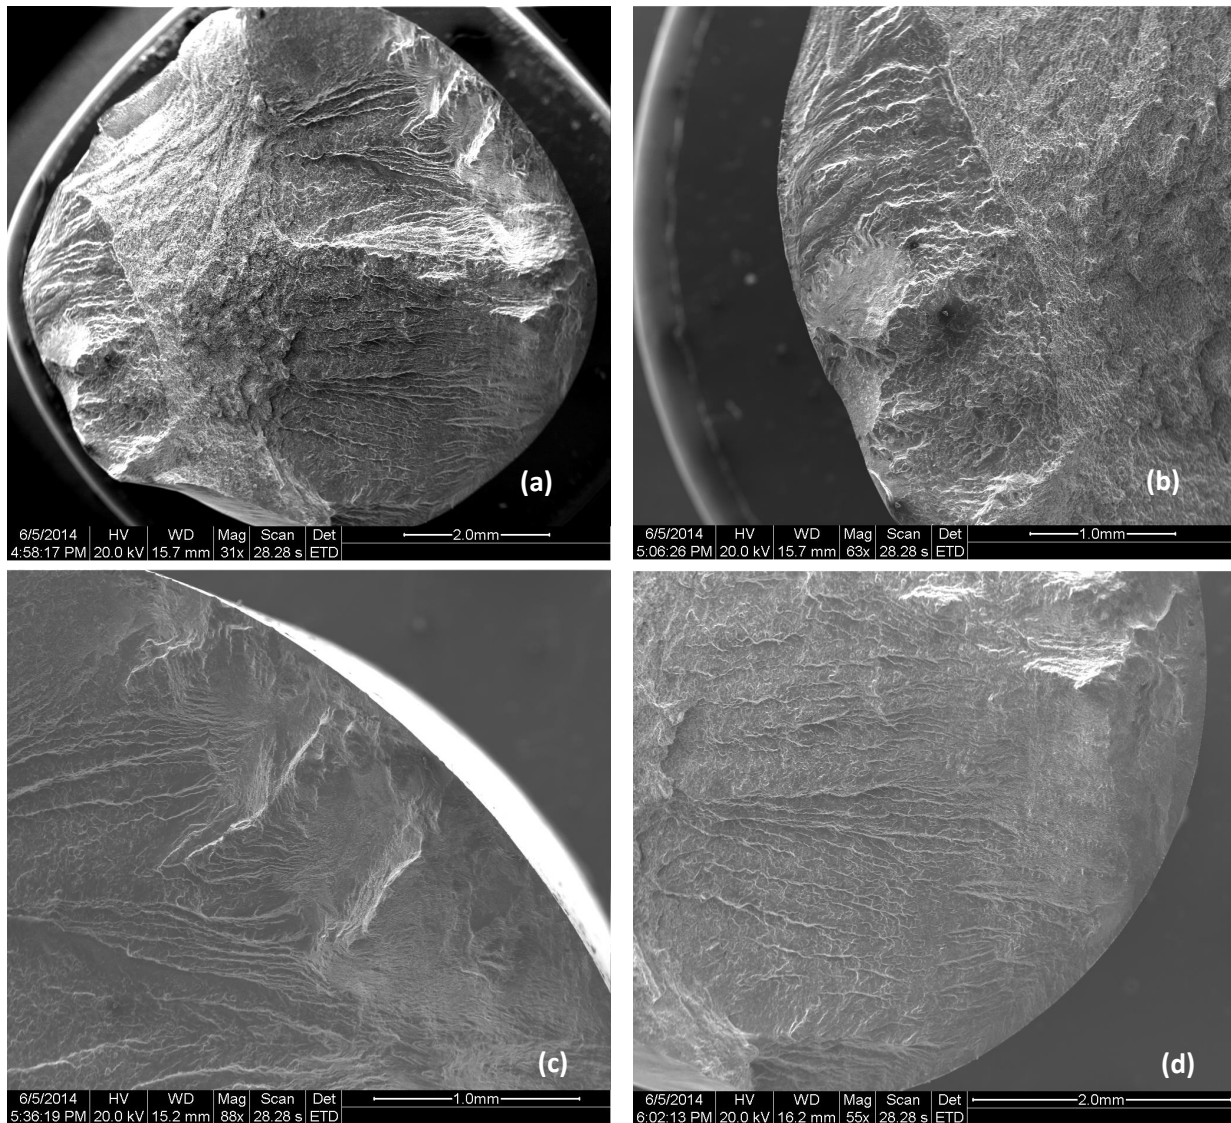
Fracture surface of sample 11. (a) Overall view of sample 11 that shows multiple cracks. (b) Crack propagating from left side. (c) Crack propagating from top right corner. (d) Crack propagating from bottom left corner.
